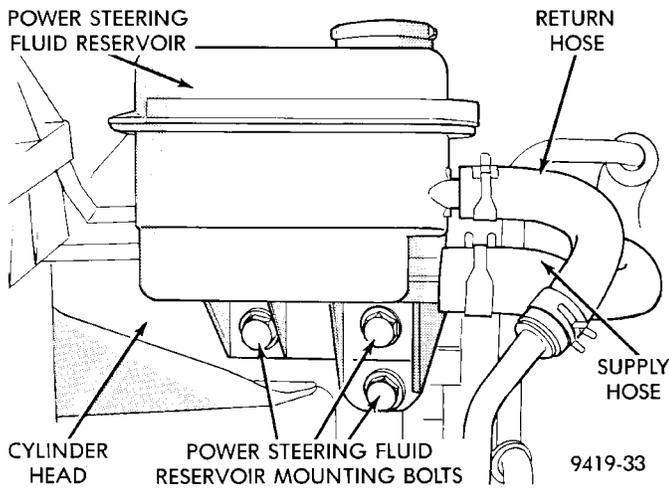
Power Steering Fluid Reservoir Hoses And Mounting
